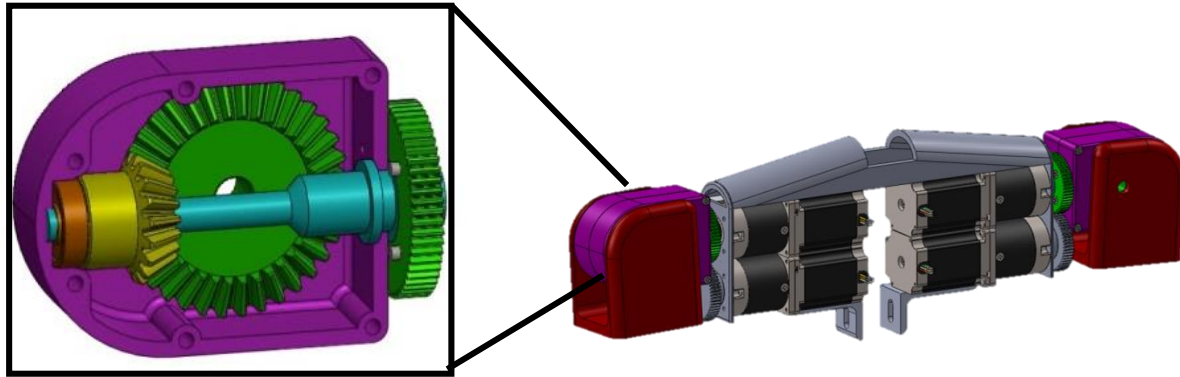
The initial design for the shoulder. The four NEMA 23 size stepper motors replace two larger and heavier stepper motors. A casing shown in red and purple was used to increase the realism of the design. The cut-out of the shoulder shows the gear system responsible for abduction/adduction for the new shoulder.
